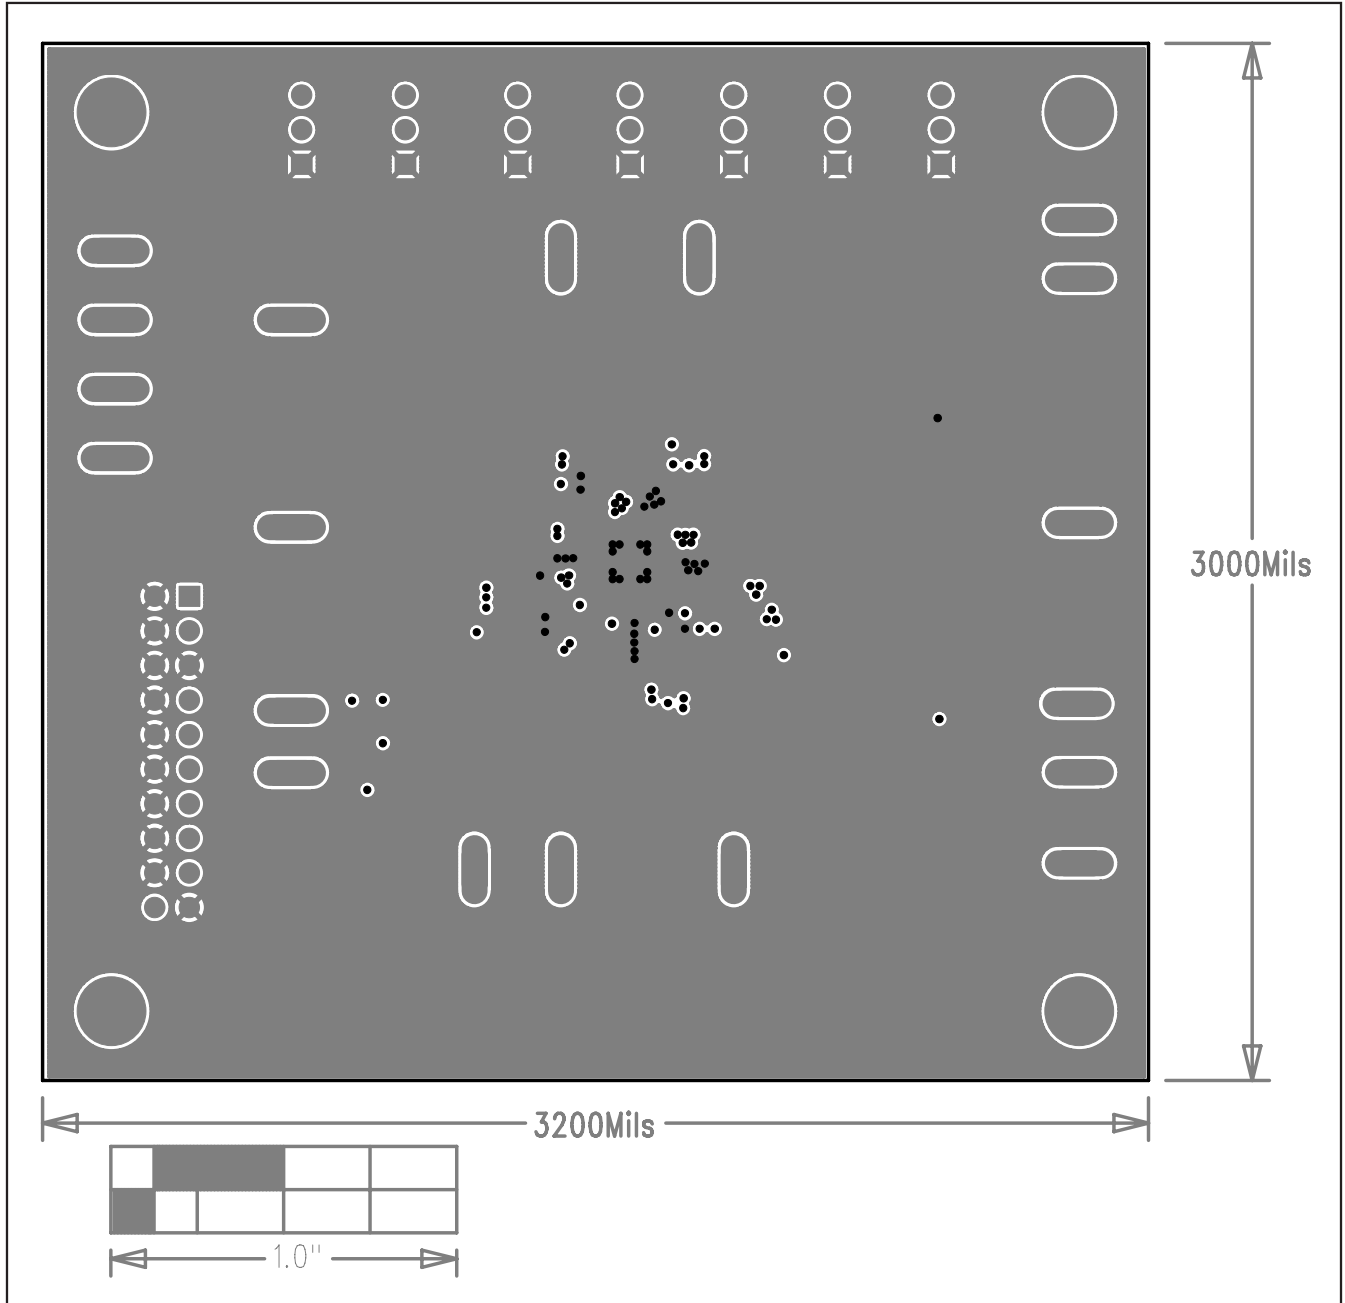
MAX8660 EV Kit PCB Layout—Ground Layer 4
